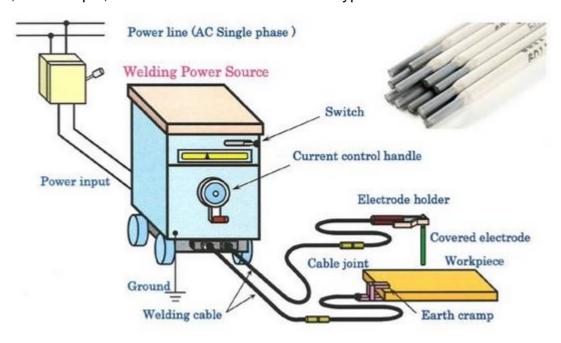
Shielded metal arc welding (SMAW) machine with Accessories
